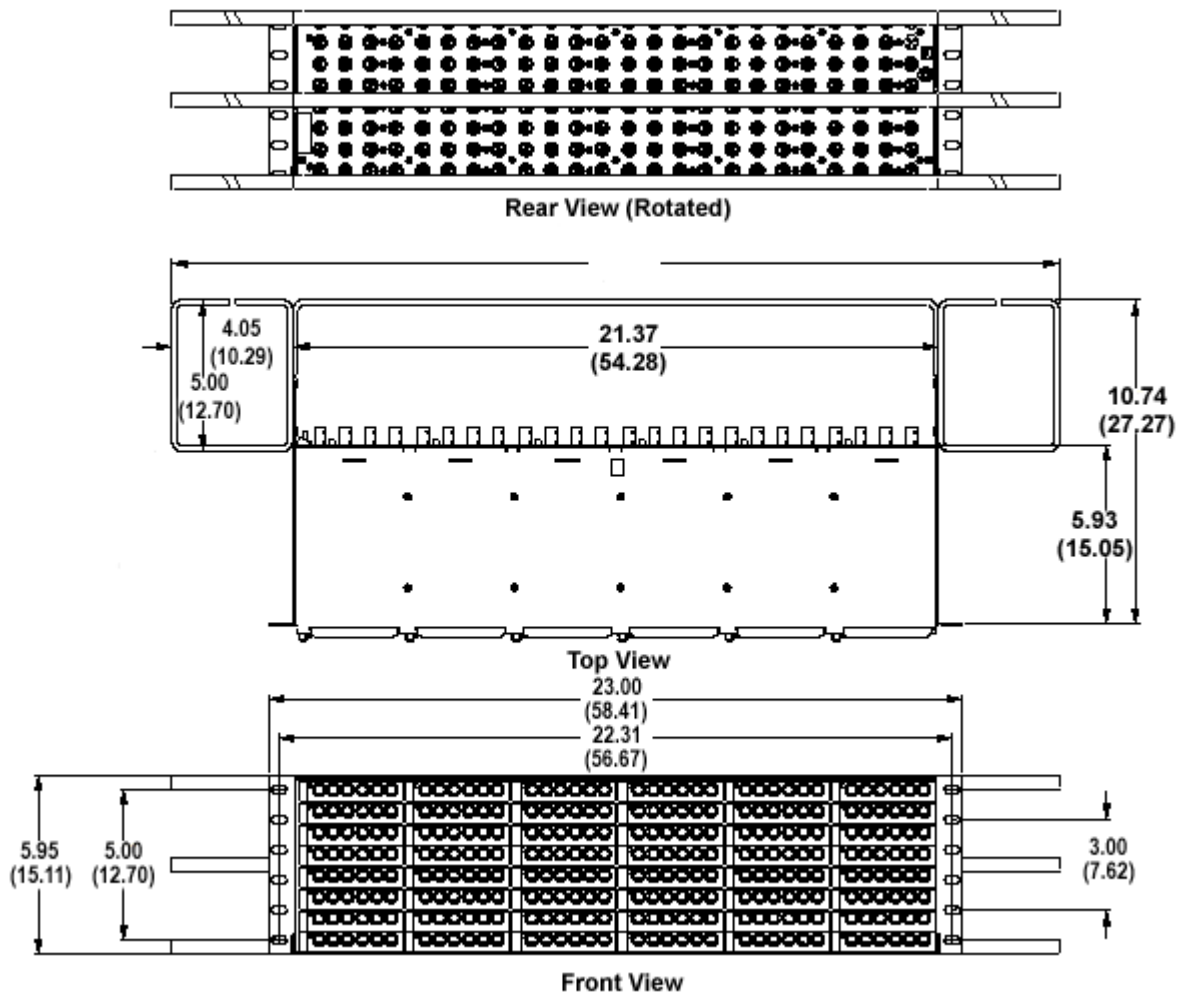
48-Position Chassis: Rear, Top, and Front Views
